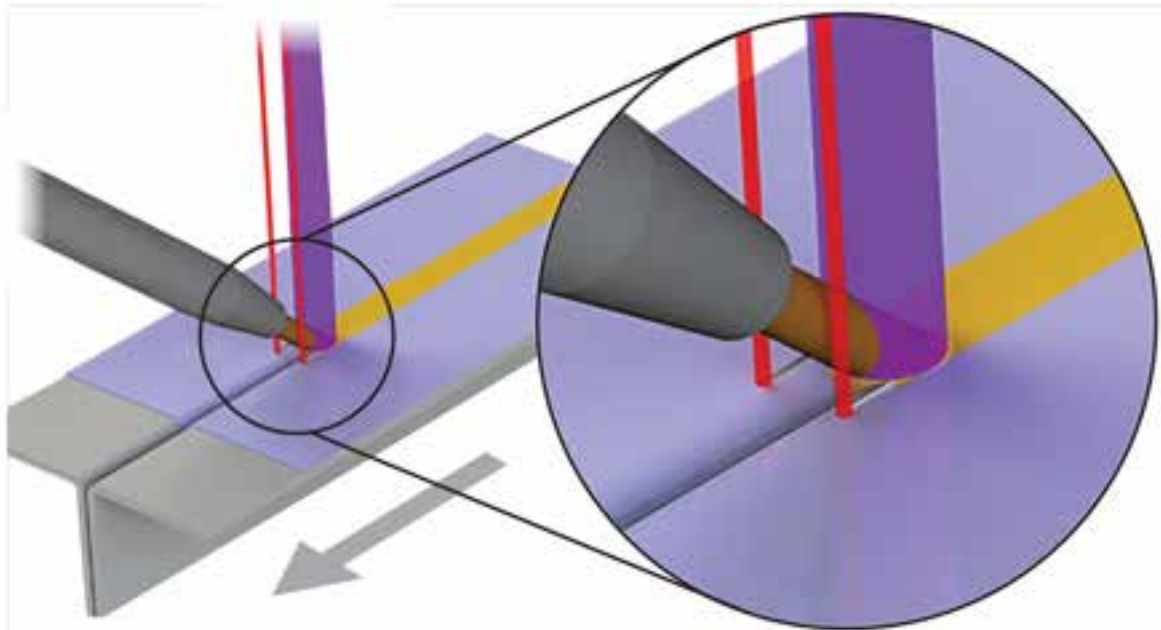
In trifocal brazing, two lead beams (red) clean and pre-heat the steel edge surfaces to promote wetting. The trailing beam (purple) melts the Cu/Si wire to form a seamless brazed joint which, after painting, can be invisible to the naked eye.
